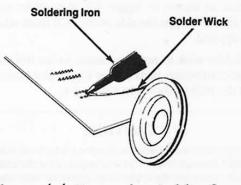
Removing Solder from Lead Connection Pads vices. When soldering a static-sensitive device, use a soldering iron with a properly grounded three-wire cord. (Refer to *Soldering Techniques* for a discussion of recommended soldering irons and procedures.)
